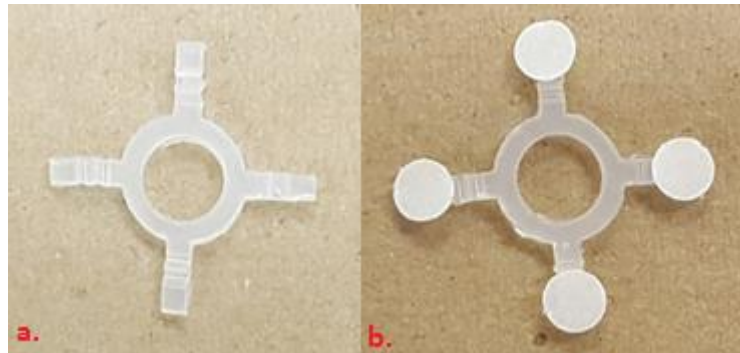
Fabricated ecoflex produced from the 3D printed mold. b: the ecoflex with the adhesive pads attached to the end points.
